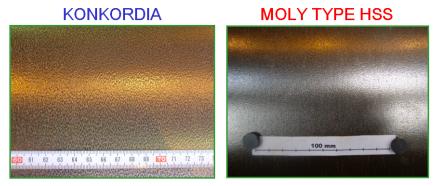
Barrel surface after rolling 2200 tons car body sheet in stand F2 of a 7-stand HSM
